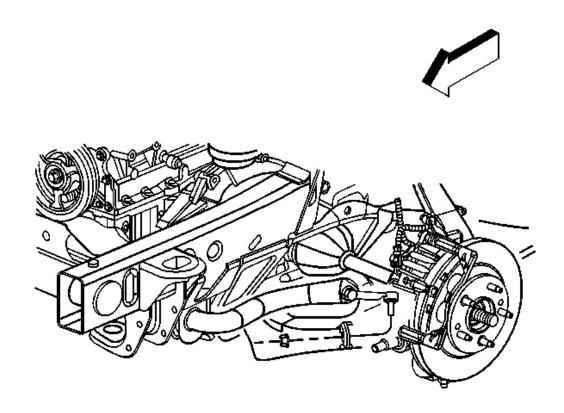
View Of Stabilizer Shaft Link Lower Retaining Nut Courtesy of GENERAL MOTORS CORP.
